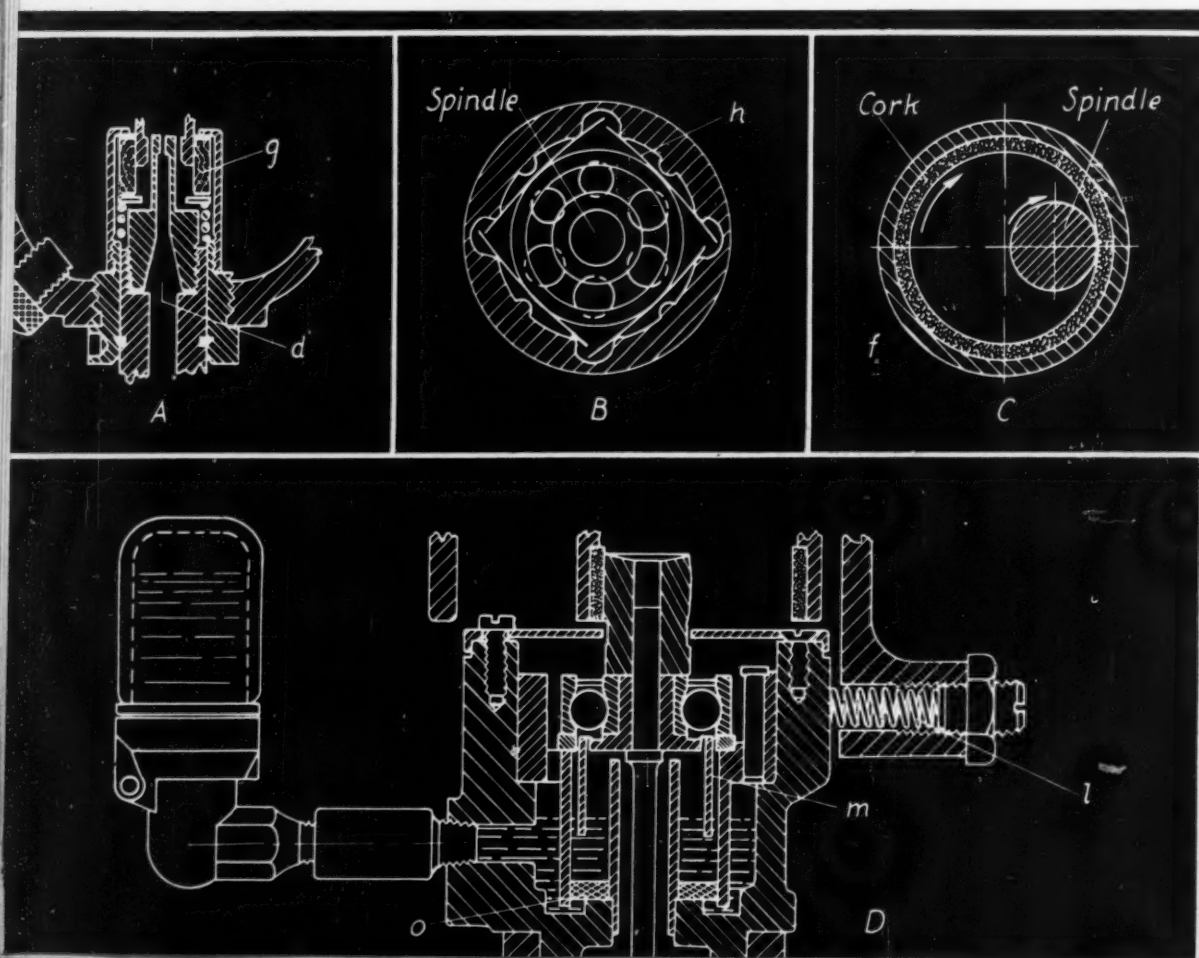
Unique bearing assemblies are employed to support rotor and provide for possible unbalance
